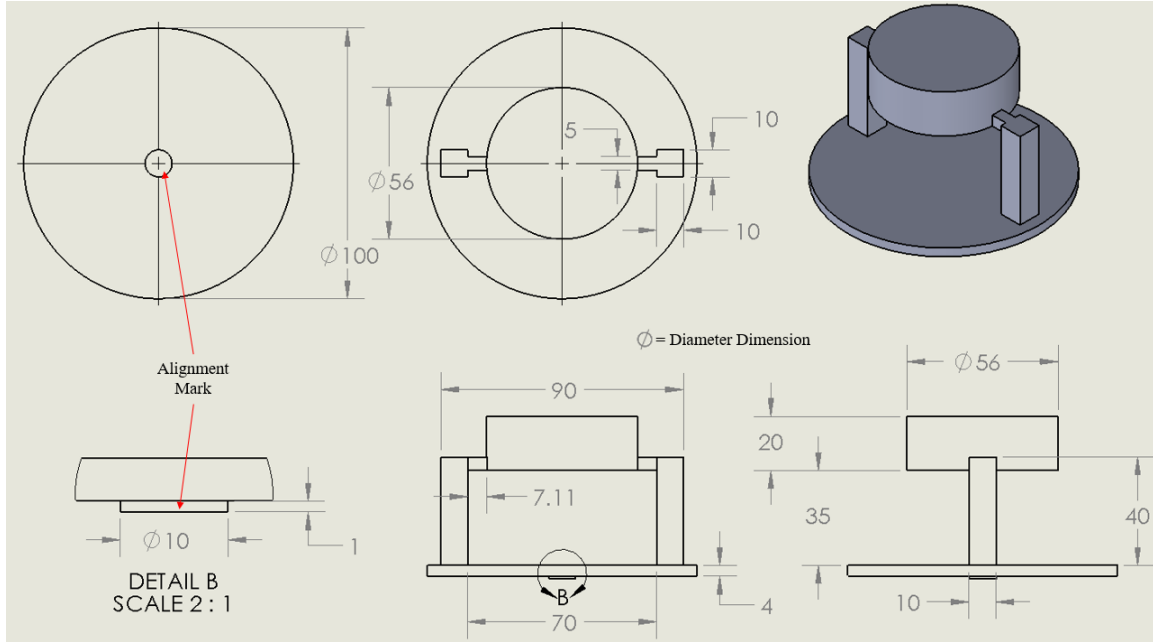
Drawing of Confocal Surface Double Cavity FPI Sensor
